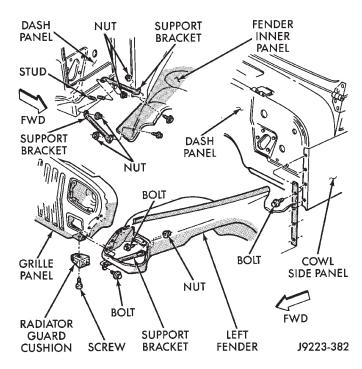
Fender Front and Rear Attaching Bolts/Nuts
